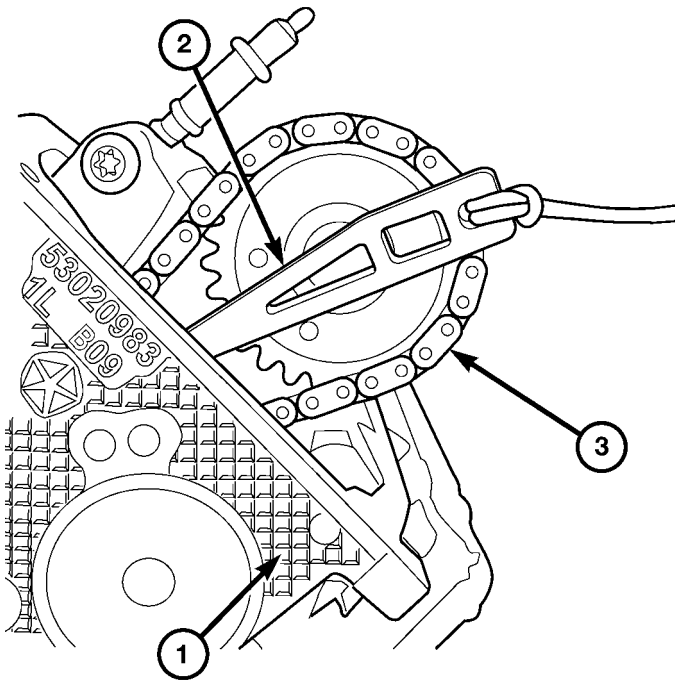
CAMSHAFT SPROCKET V6 MARKS (#1 TDC, Exhaust stroke)
